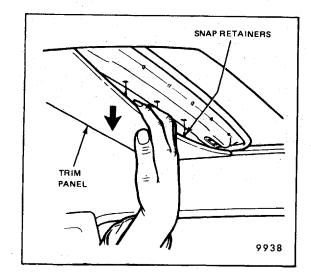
Disconnecting Headlining Panel Snap Retainers
